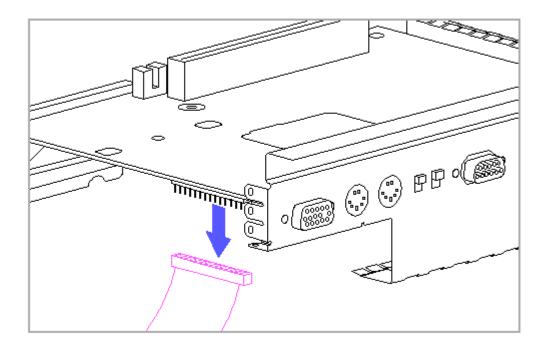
Disconnecting the Harness Extension Cable from the System Board
